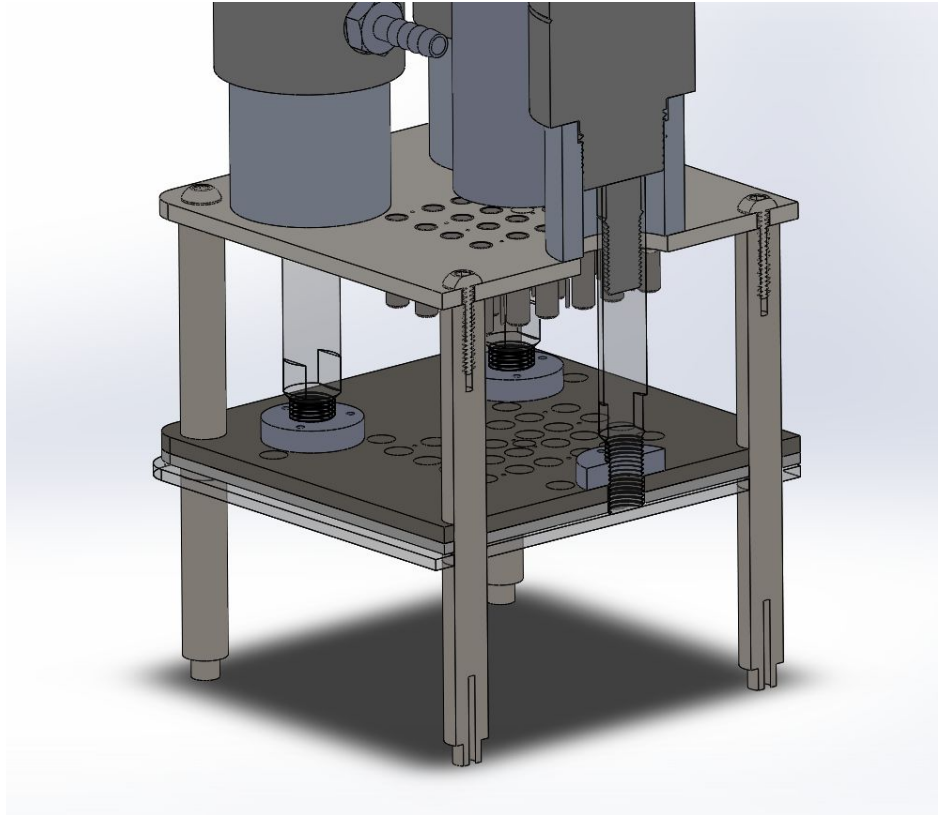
A partial section view of the upper portion of the assembly to show pneumatic system
